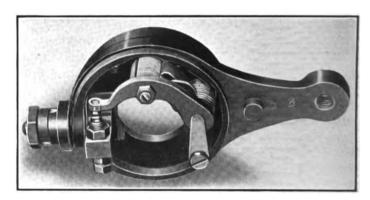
Circuit Breaker of Splitdorf Magneto Removed to Show Construction and Operation of Piatinum Contact Points.
